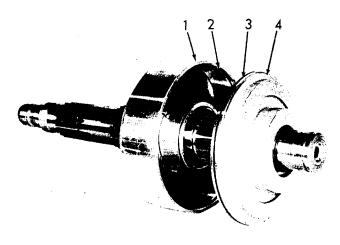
Actuating Piston Prior to Installation in Piston Housing (T-70968)
